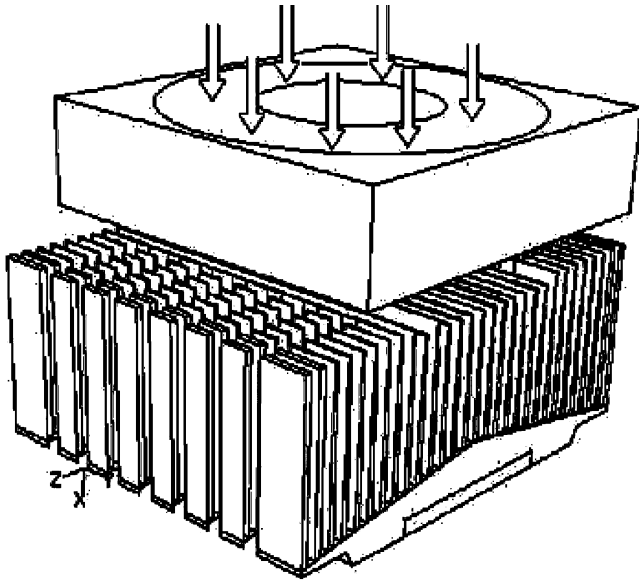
Air flow direction shown on Evercool NW9F715CA heat sink fan assembly.
